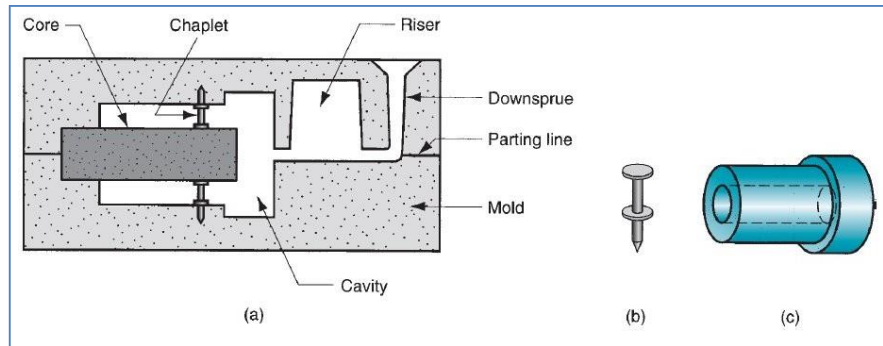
(a) Core held in place in the mold cavity by chaplets, (b) possible chaplet design, and (c) Casting with internal cavity.
